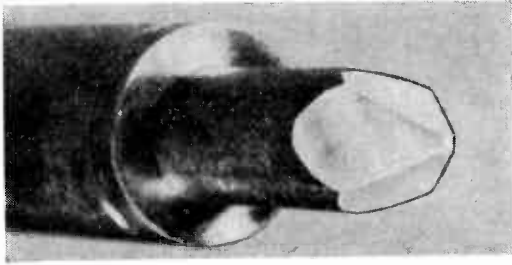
Close-up photograph showing a properly tinned soldering iron tip. Note that only the flat surfaces of the copper tip are tinned.
